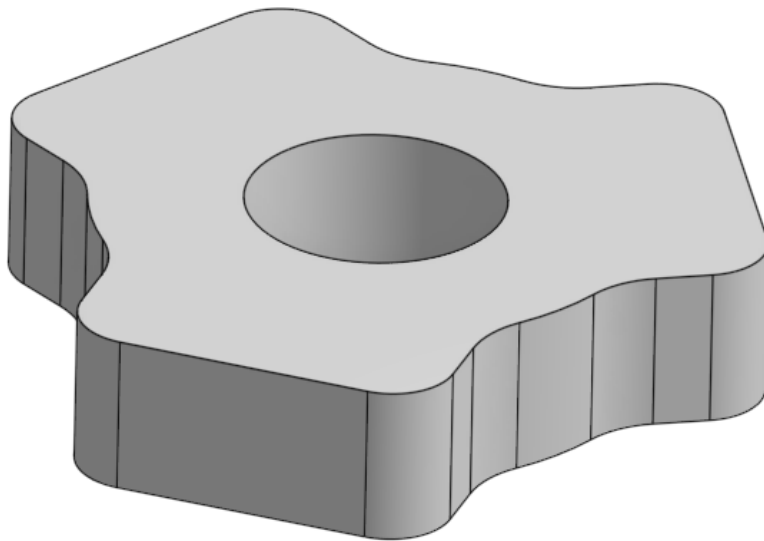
Threaded limit plate CAD Model: Isometric (seen without central threaded brass fitting)
